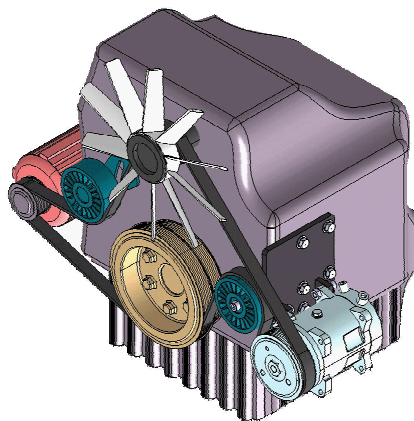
Application of Motor Axle with Belt - rim Mechanism.
